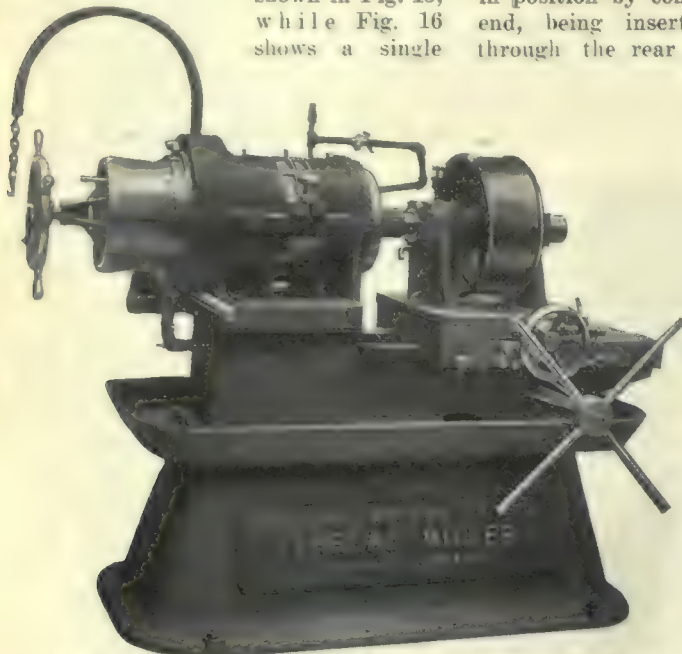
VIEW OF THREAD MILLER SHOWING CRANE FOR REMOVING BREECH BLOCK FROM BACK END OF SPINDLE.
